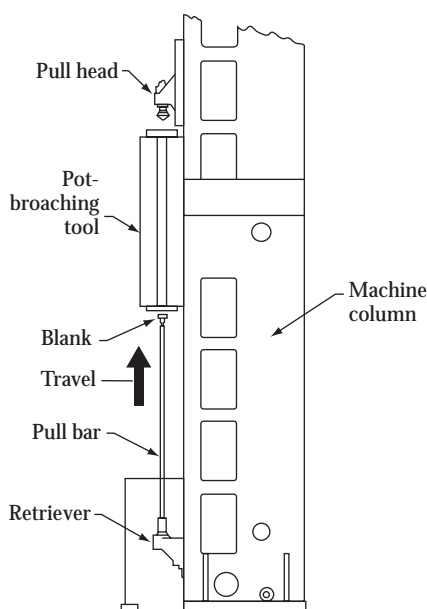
Sketch of broaching machine for pull-up pot broaching.
